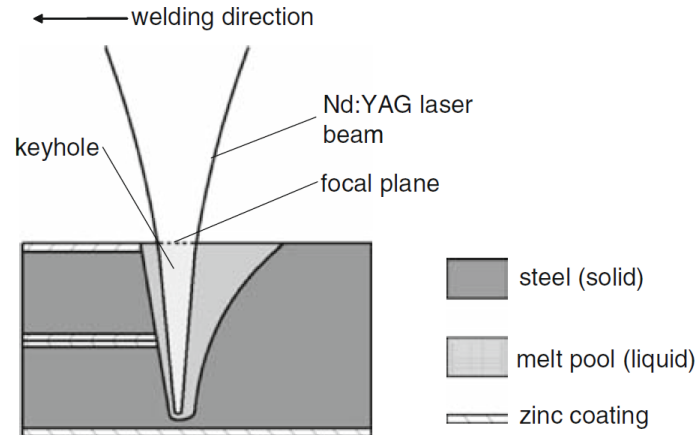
Lap joint laser beam welding of zinc-coated sheets²³⁷
